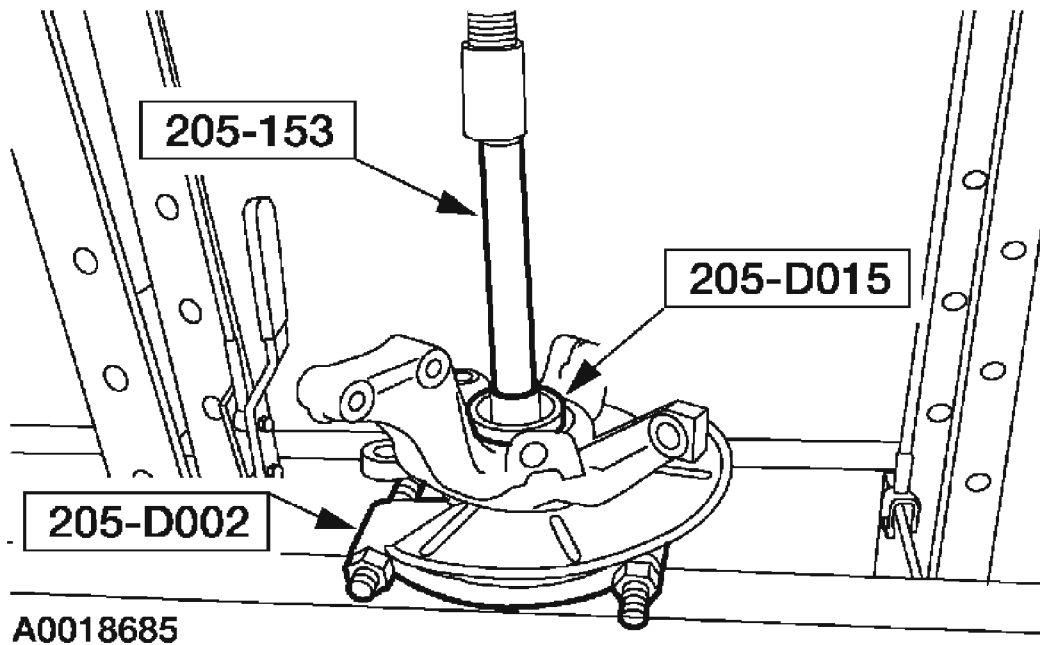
Pressing Wheel Hub From Wheel Bearing
